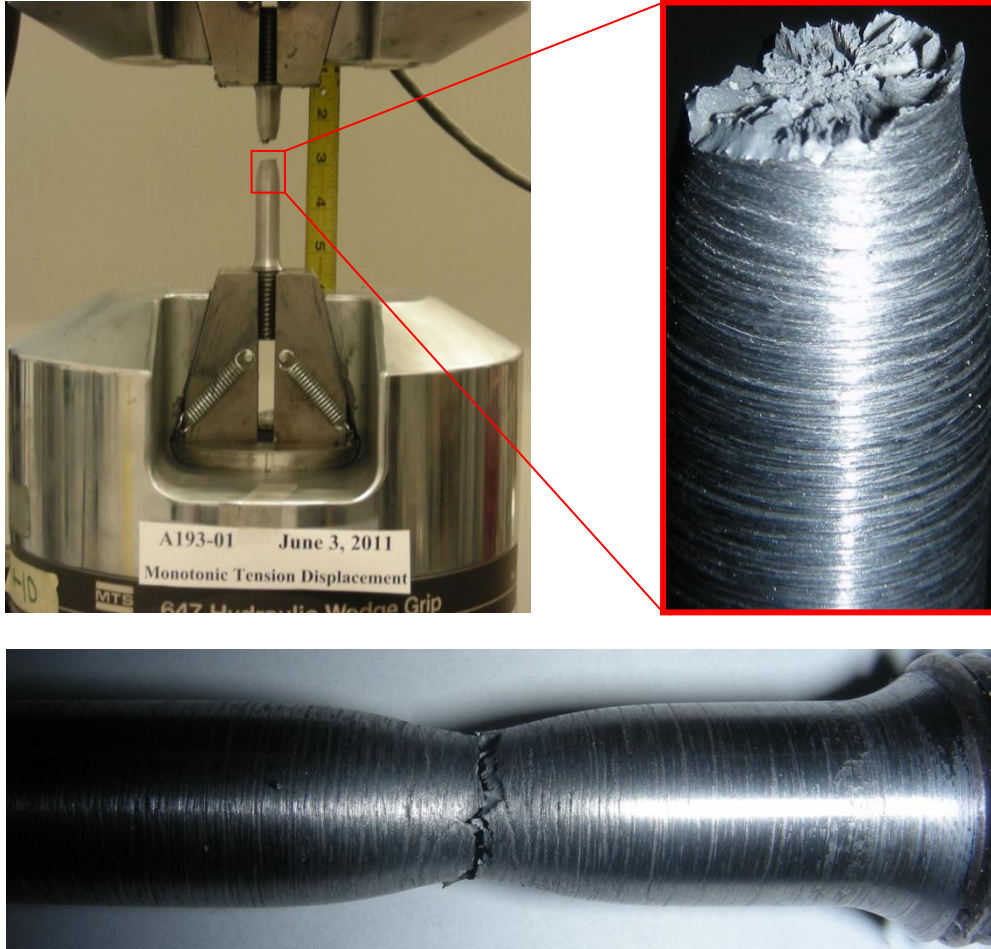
Tensile fracture surface of A193 anchor rod
